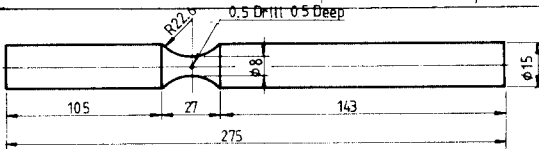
Shape and dimension of fatigue test specimen(unit: mm)
